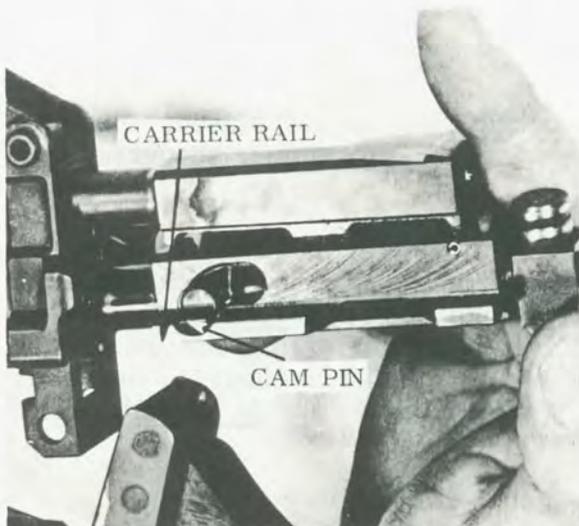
Cam pin aligned with the bolt carrier rail.
